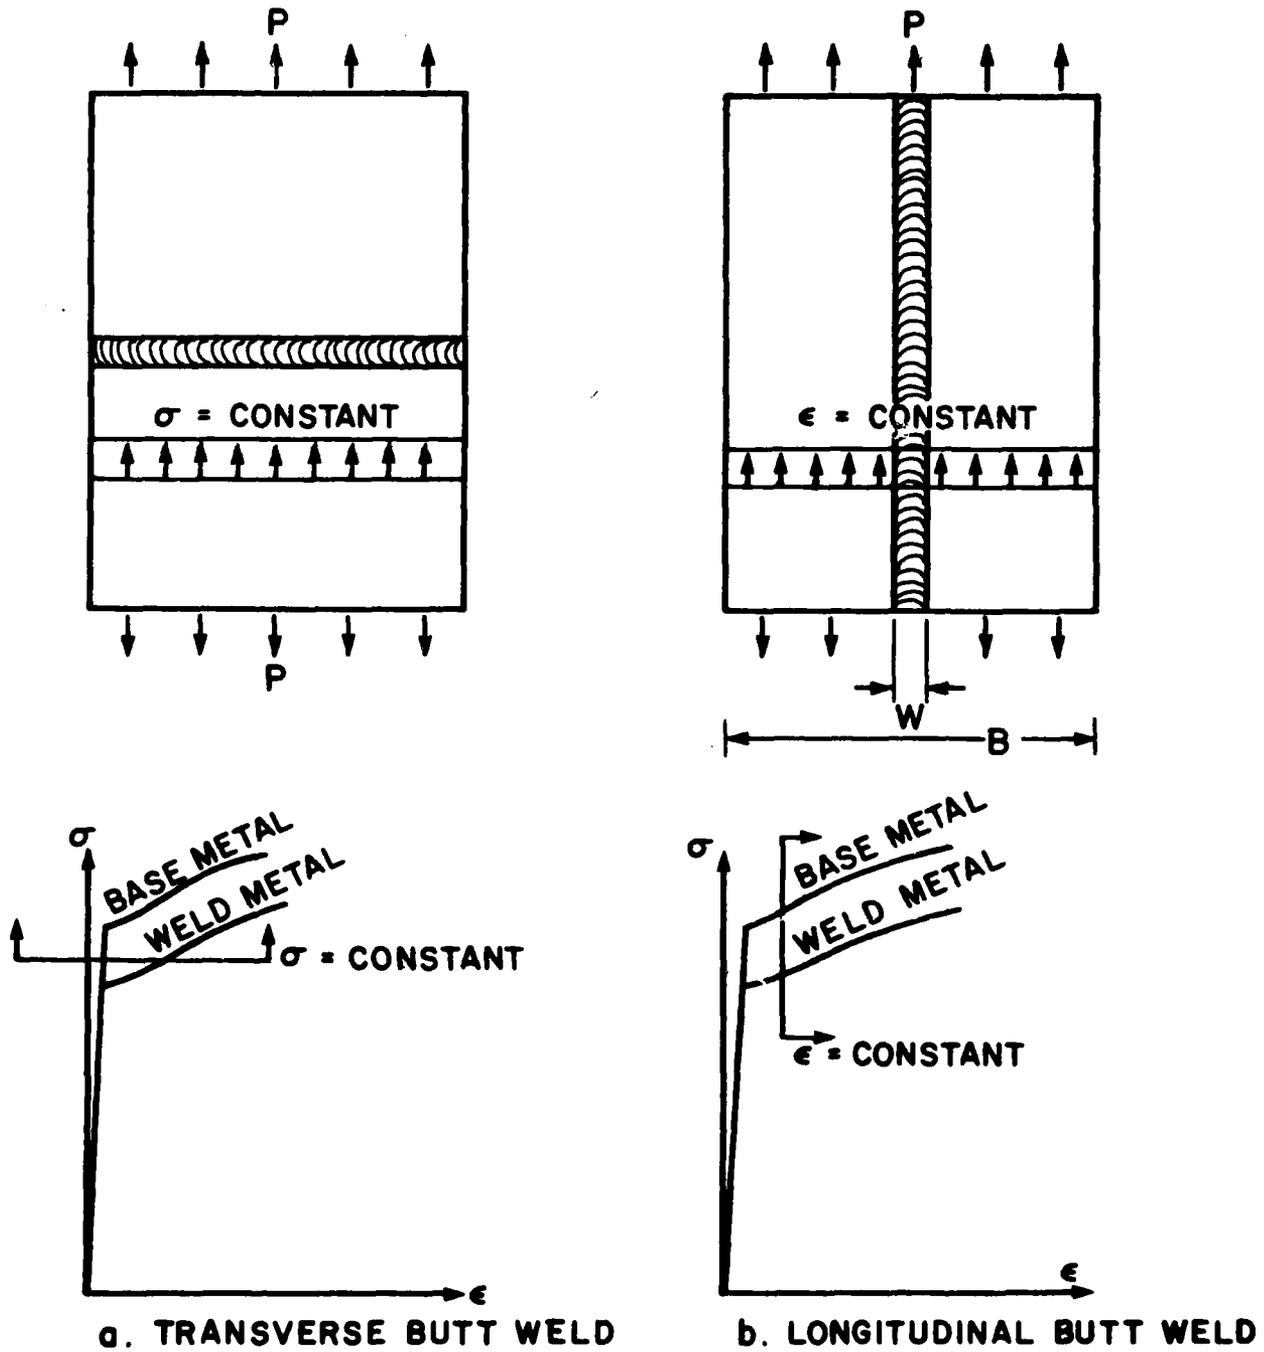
(a and b) Butt welds subjected to tensile loading.
